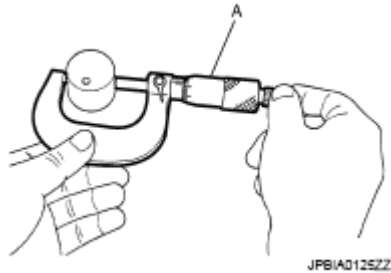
Measuring Outer Diameter Of Valve Lifter
